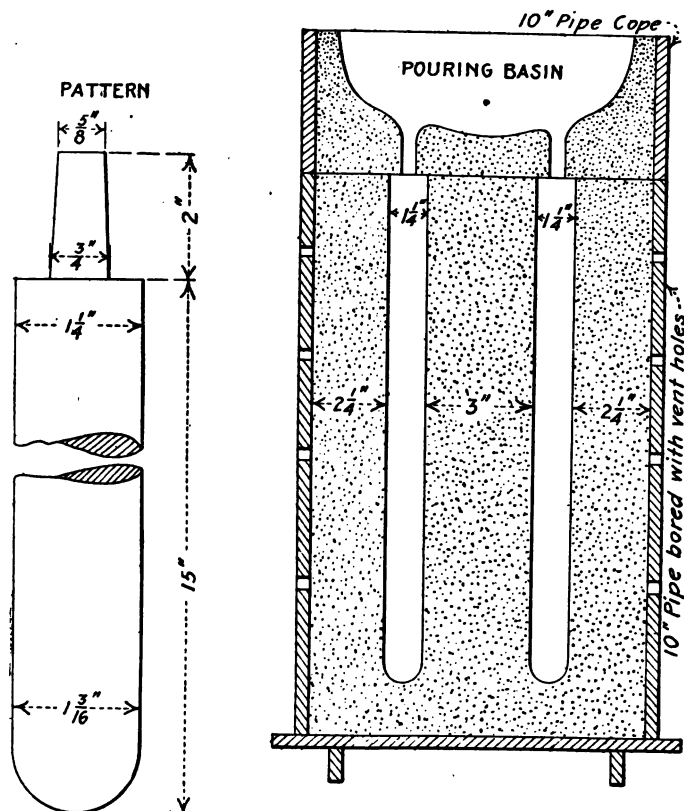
DETAILS OF PATTERN AND MOLD REQUIRED FOR ARBITRATION BARS IN TESTING GRAY-IRON CASTING MATERIAL
